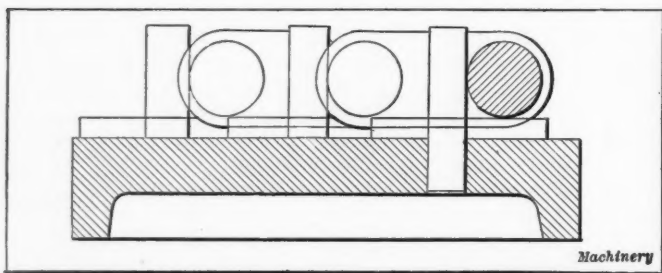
Section of Plate and Crankshaft in Fig. 1 in Enlarged Scale
